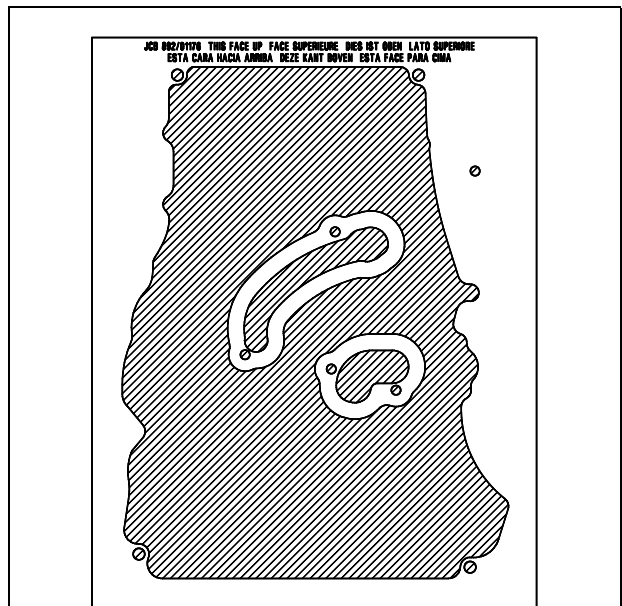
892/01176 Template For Application Of Gear Case To Engine Block Anaerobic Sealant
